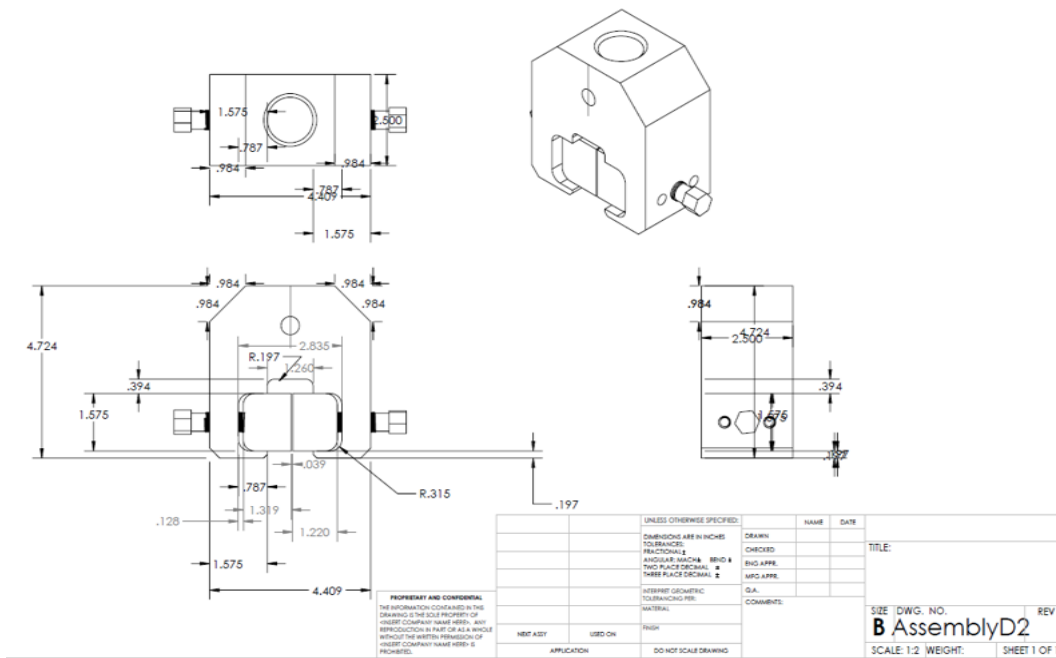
Mechanical drawings of different components of the grips and fixtures assembly.
